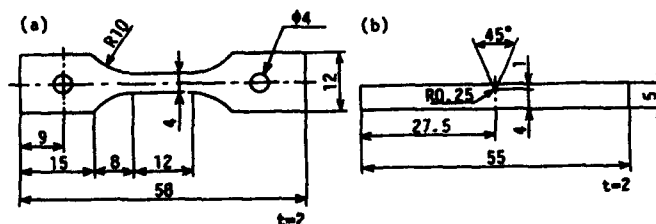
Specimens used for (a) tensile test and (b) Charpy impact test
